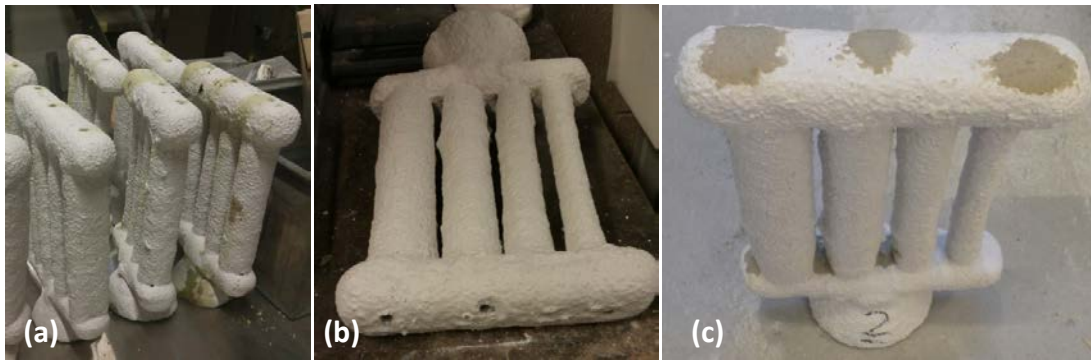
5: De-wax improvements: (a) Wax exited from holes drilled before de-wax (b) Moulds examined for cracks after burnout (c) Holes plugged with firing clay before the second furnace cycle
